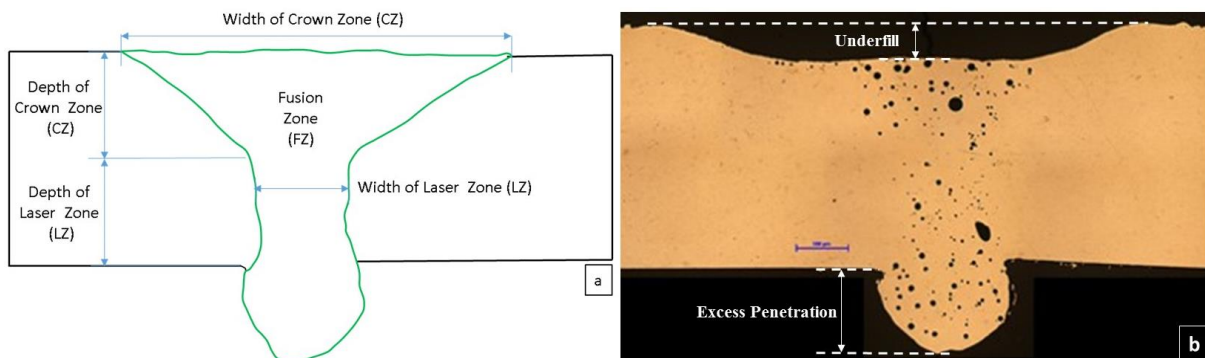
a) cross section draft of the weld with the geometrical features of the fused zone, b) example of defects: porosity, excessive penetration (root drop-out) and under filling.
